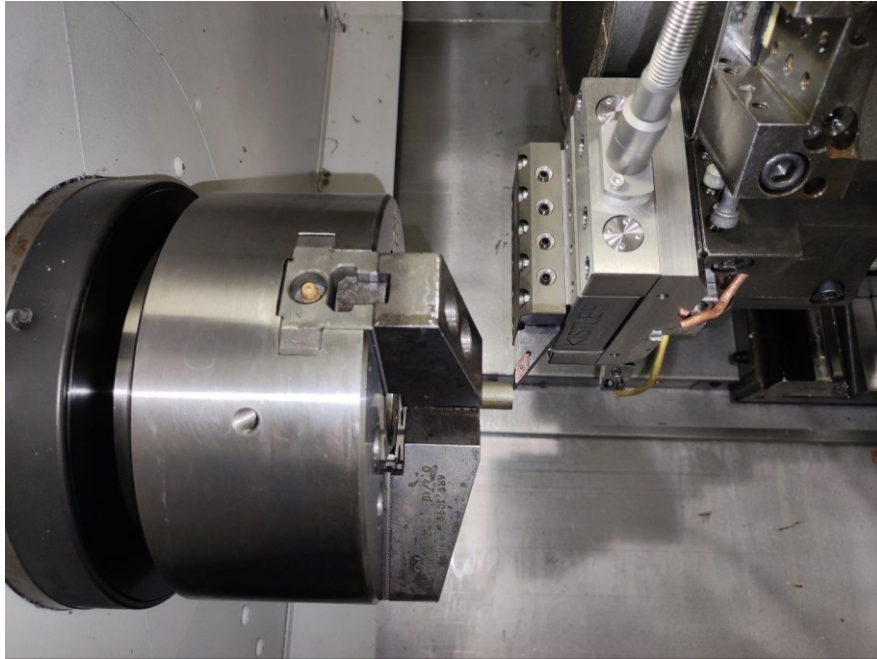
Mori Seiki™ CNC lathe set up with VCEX 110301L-F 1125 tool.
